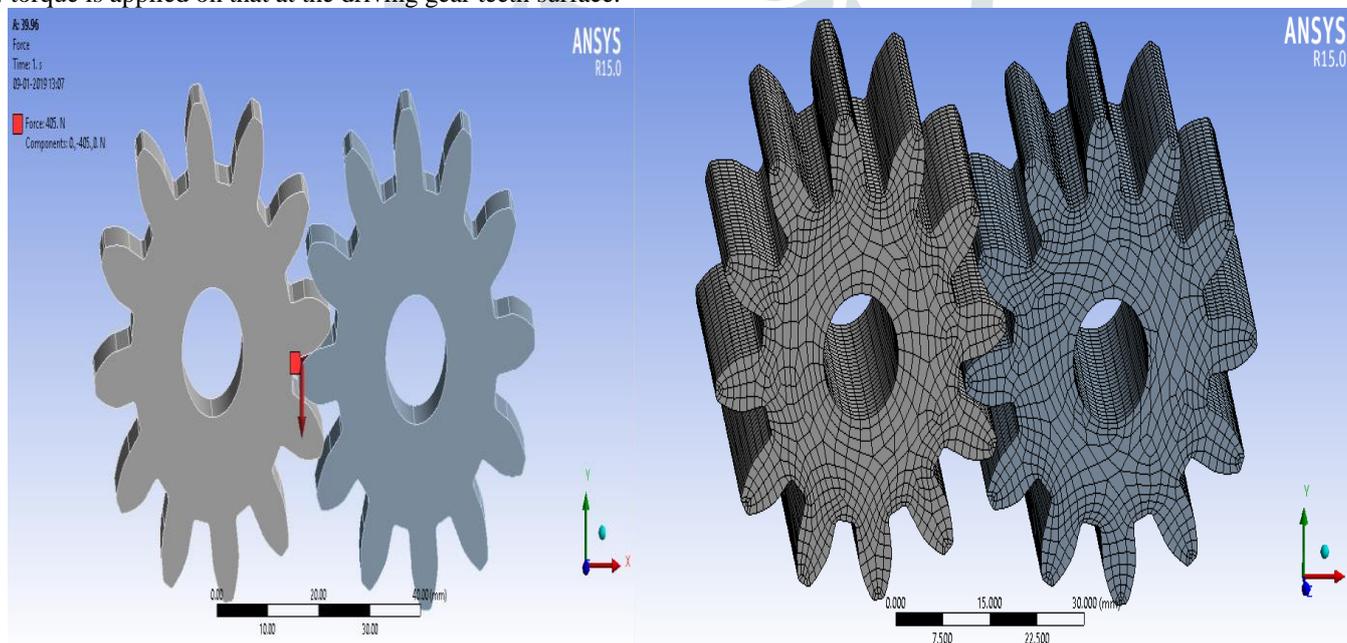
(a) spur gear assembly with of contact region, (b) Meshed gear pair.
